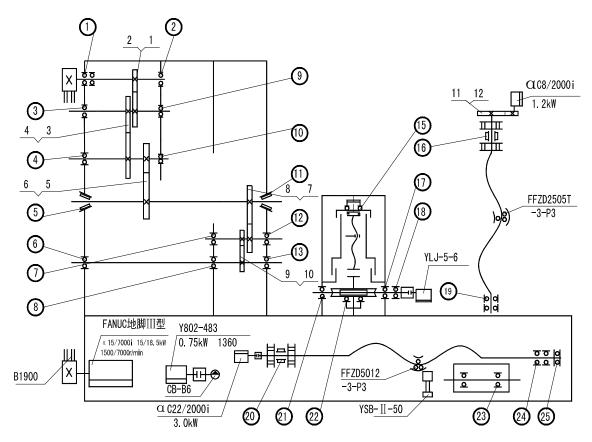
Schematic drawing of transmission system with main servo motor of the machine
